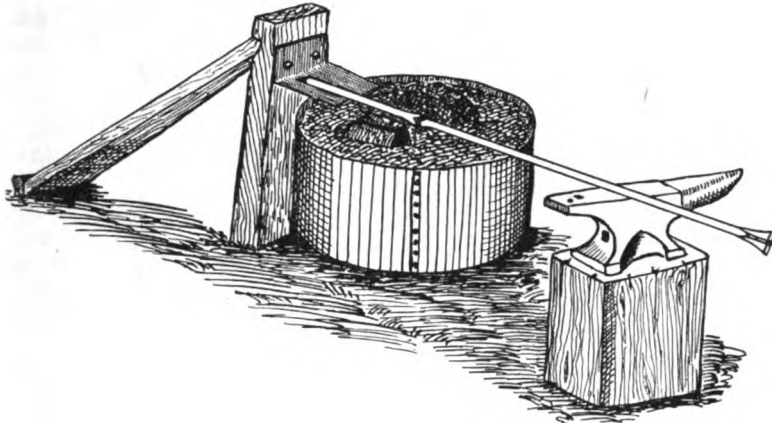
THE RODS ARE EASILY WELDED IN THE FIRE BY THIS PRACTICAL ARRANGEMENT
